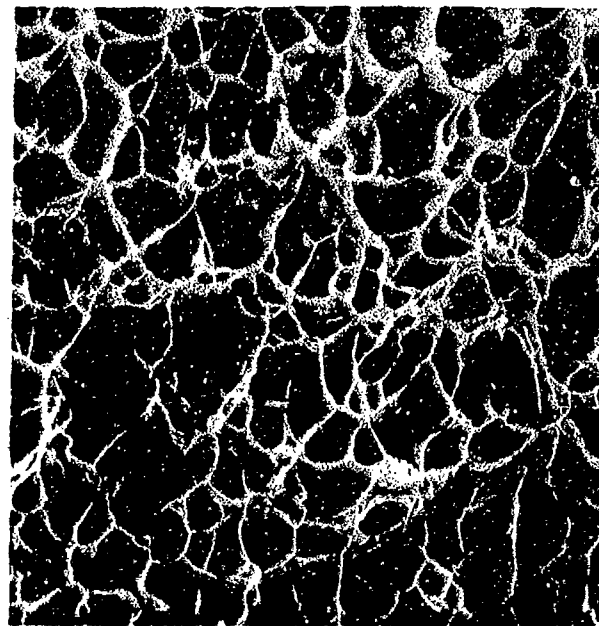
Equiaxed dimples on tensile fracture surface of AX-110 weldment, 4600x.
